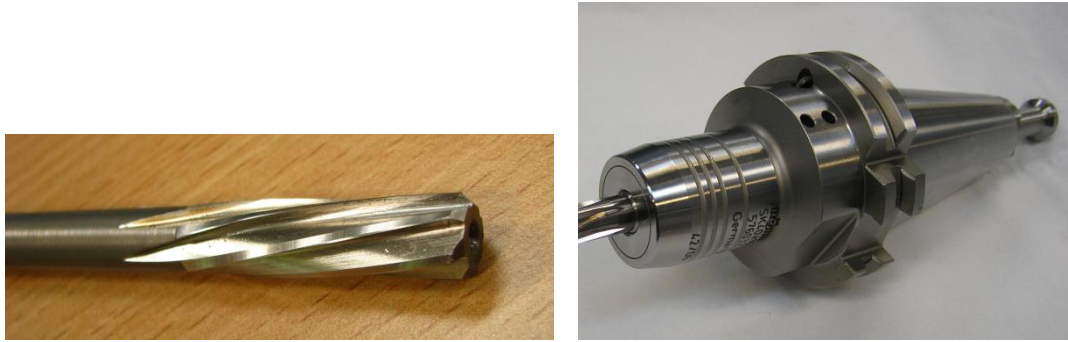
a) HSS-E Cobalt reamer; b) Tool holder
